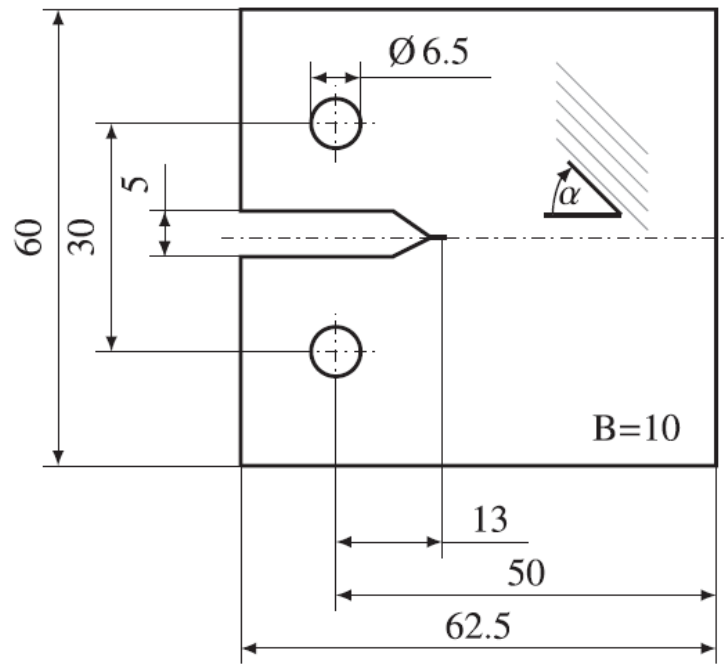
Dimensions of specimen with unit in millimetres (mm) [15]
